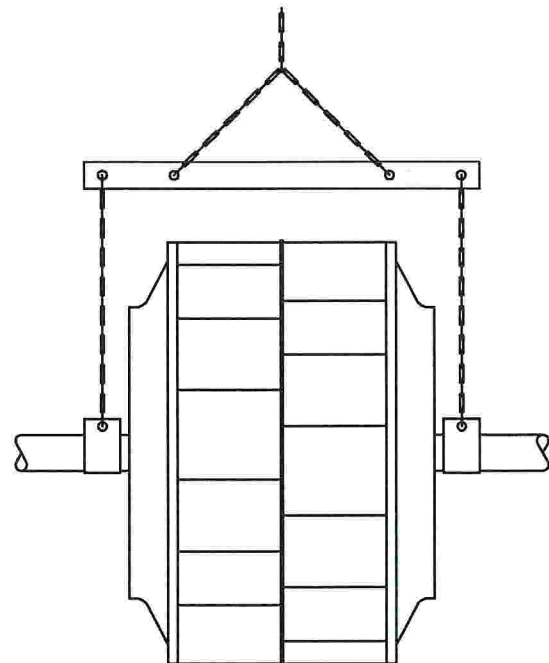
Correct use of spreader bar when lifting centrifugal rotor assembly.
